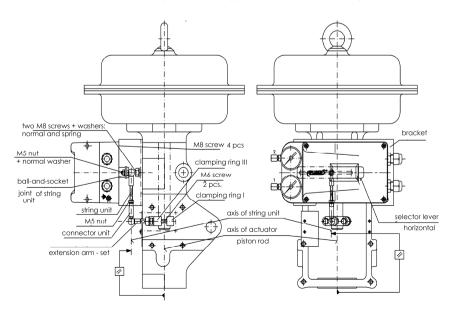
APIS-100-...type positioner with mounting set APIS-A002 (positioner assembled on multispring actuator of P1 or R1 type manufactured by Polna S.A.)
